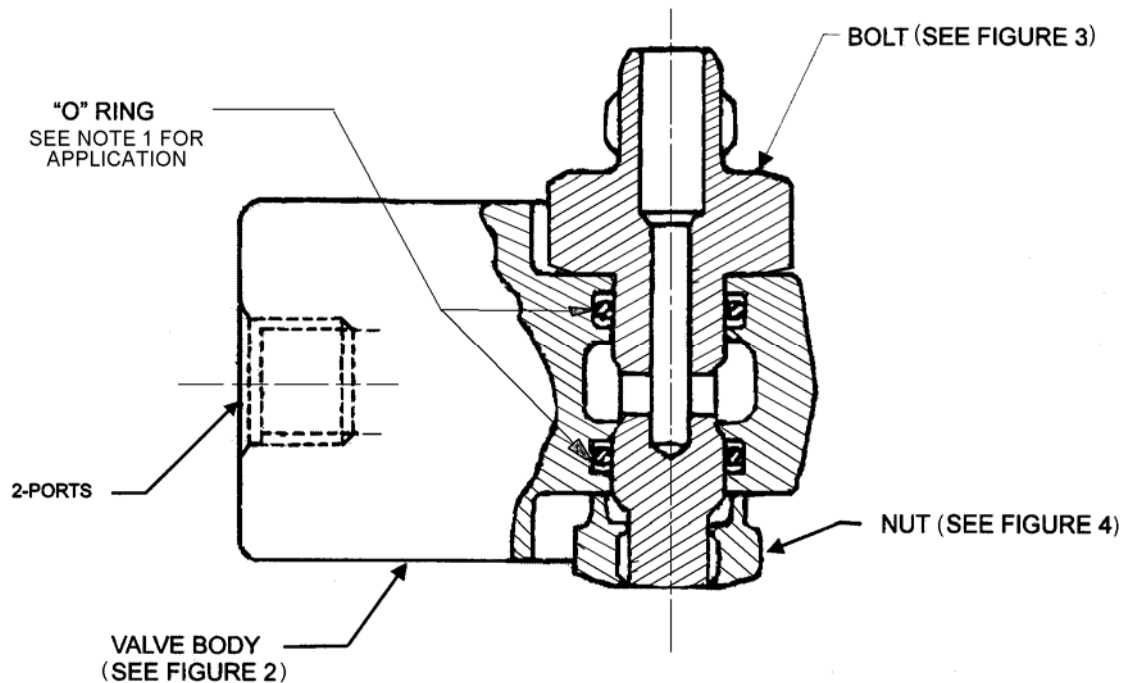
Valve assembly with bolt and nut installed in the body.
